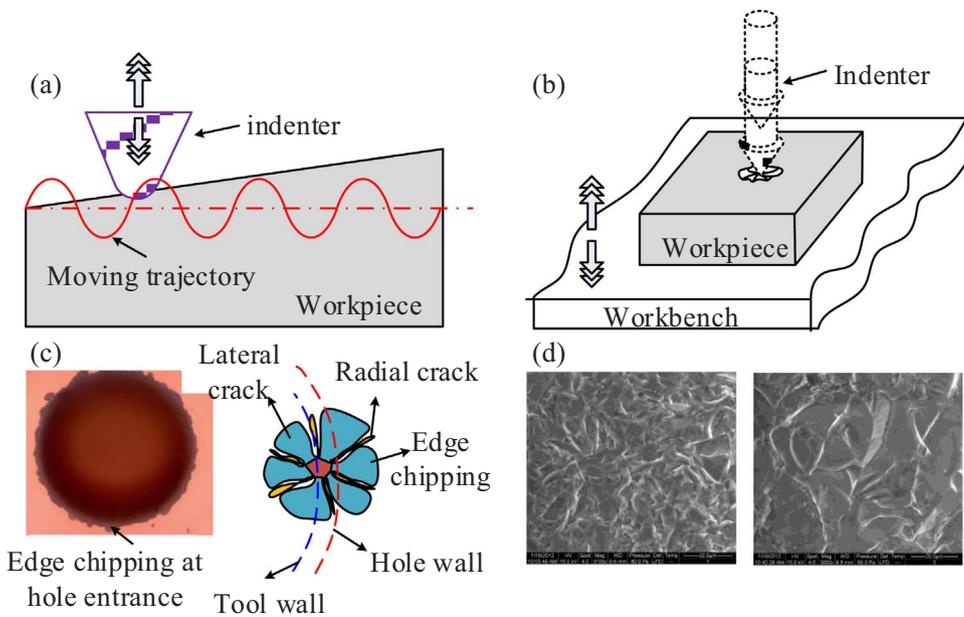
Research methods for RUM material removal mechanism. (a) ultrasonic vibration assisted scratching, (b) ultrasonic vibration assisted indentation [22], (c) edge chipping at hole entrance [36], (d) surface morphology.
